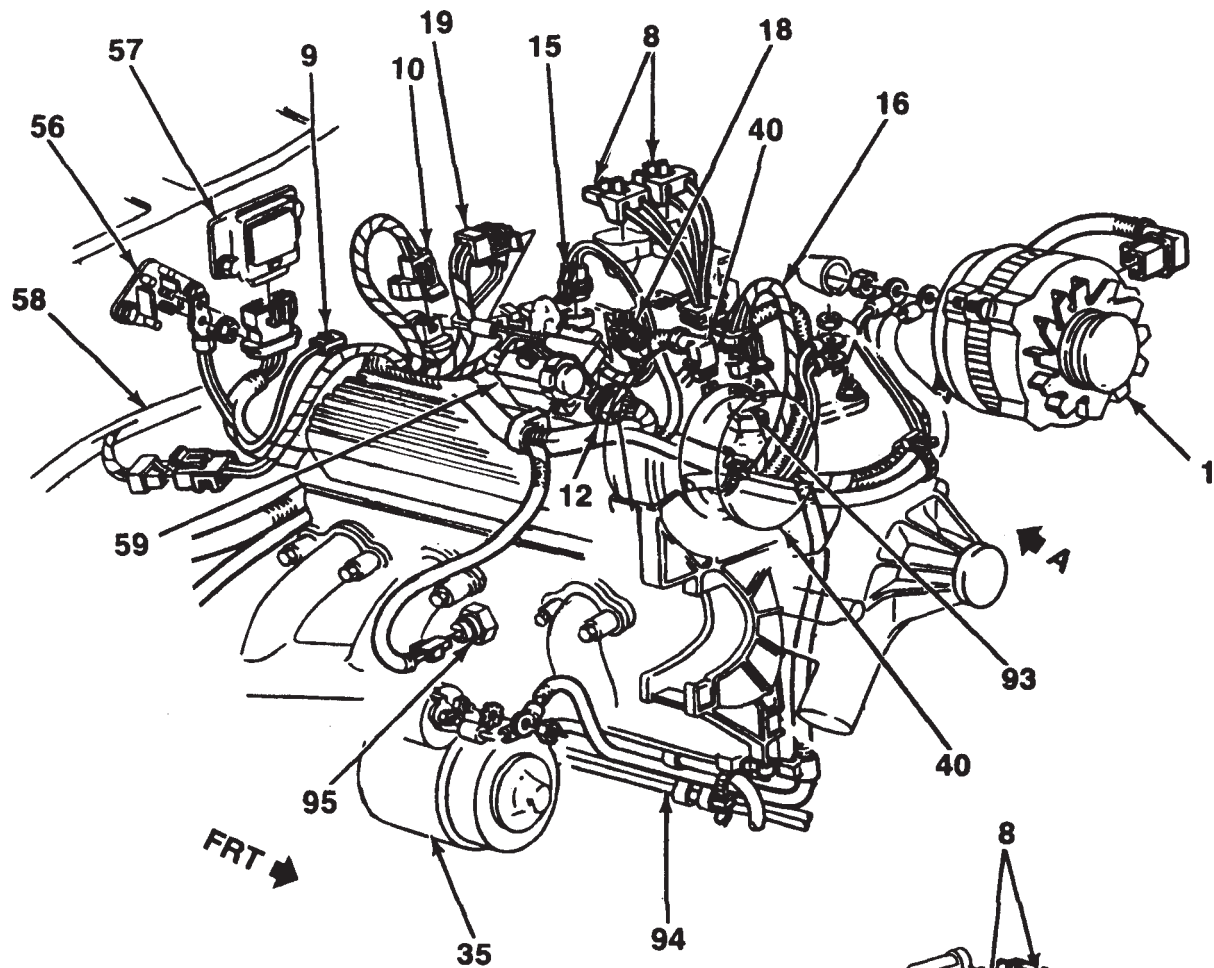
Engine Wiring - Left Side - 2.8L Engine
